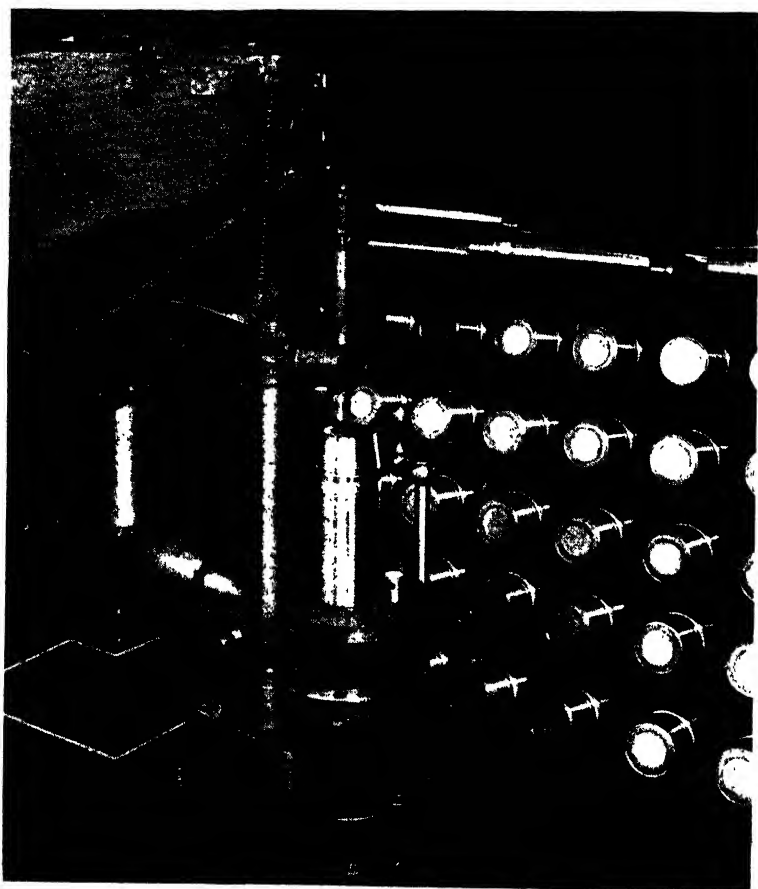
Roller Type of Spot-welding Machine Used to Weld a Sheet-metal Disk on Base Ends of Some Types of Shells
